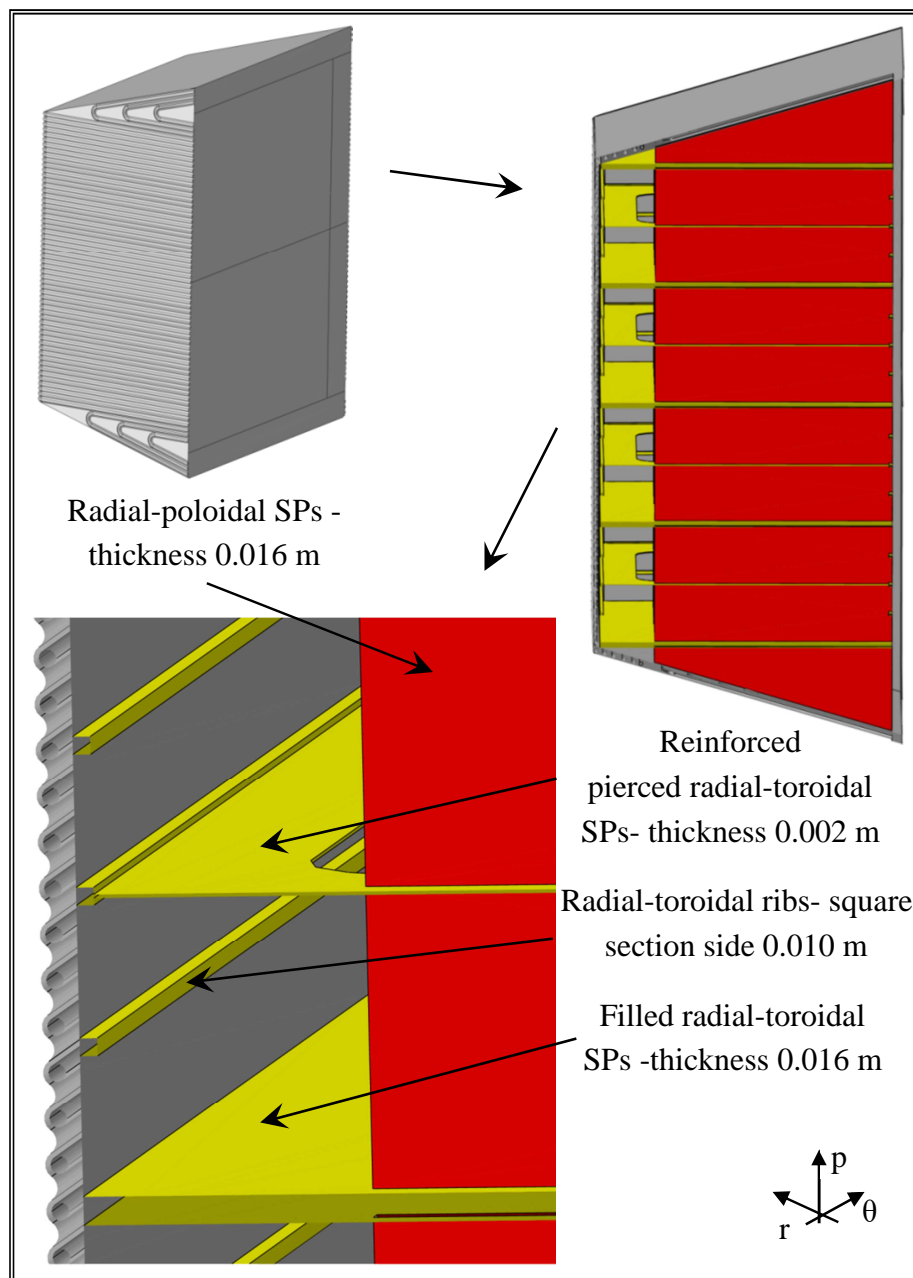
Configuration 3 - Case 4 - 3D geometric model exploded view.
